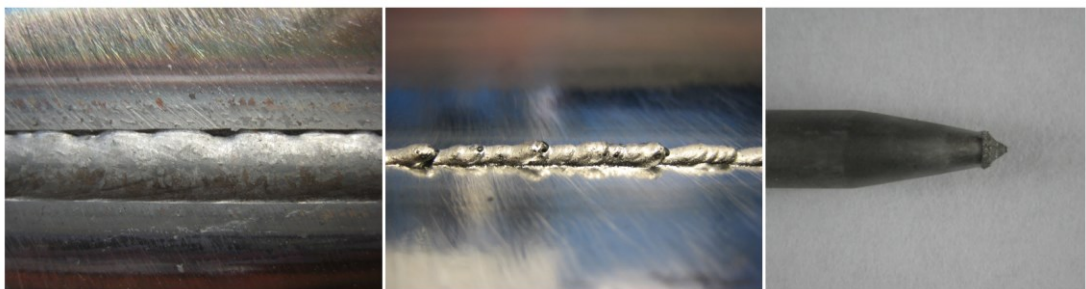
Typical weld defects in preliminary weld tests in 8 mm plates: undercuts (left), excessive penetration (middle) and damaged electrode (right).
